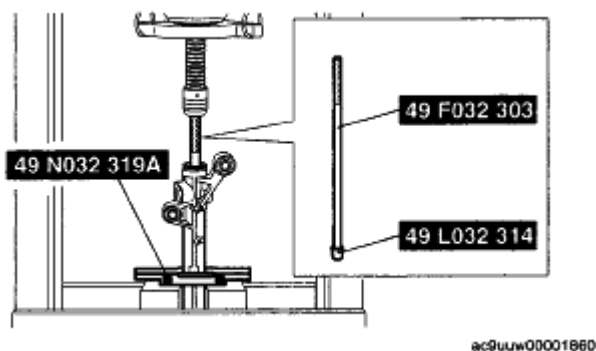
Removing Oil Seal (Gear Housing Side) And Inner Guide Using Press
